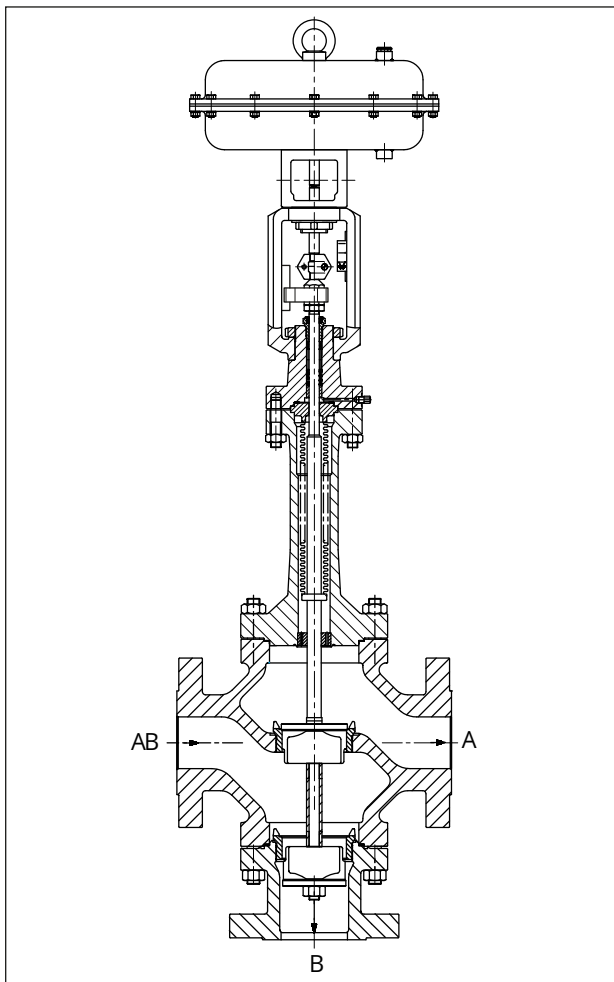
Type 3253-7 Control Valve with Type 3277 Pneumatic Actuator (only up to DN 100/NPS 2) • Valve body version for DN 40 to 500/NPS 1½ to 20 • Plug arrangement for diverting service • (anti-rotation fixture for DN 50/NPS 2 and larger)
